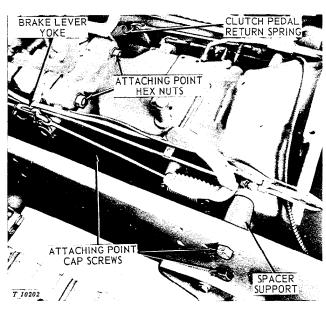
Reverser Case or Clutch Housing Attaching Points
